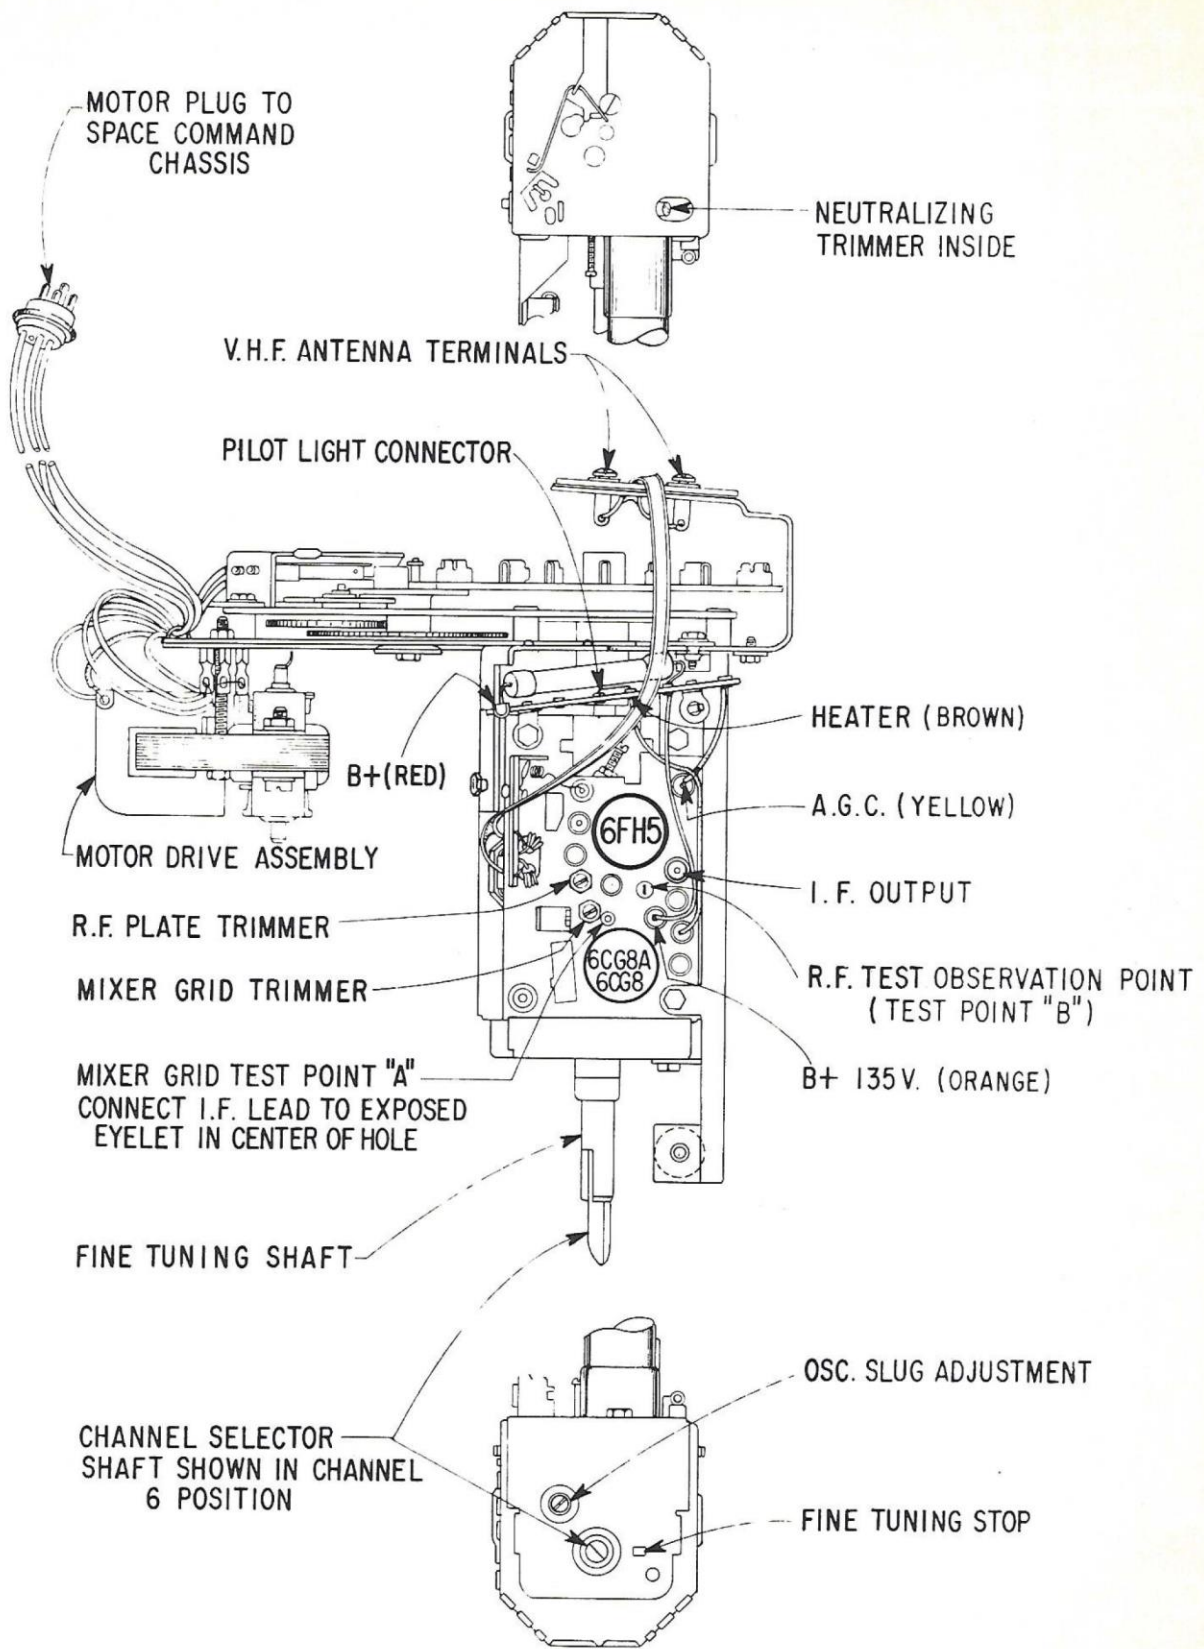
Tube and Trimmer Layout 175-148 Target Tuner
